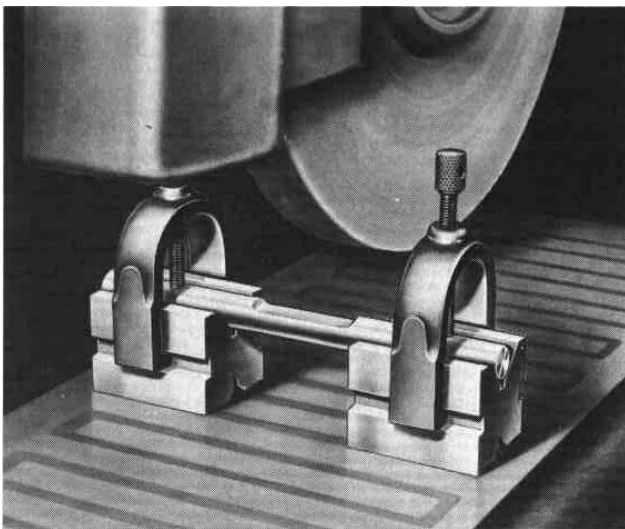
Method of blocking workpieces with small contact area on magnetic chuck to prevent their moving under pressure of grinding.
